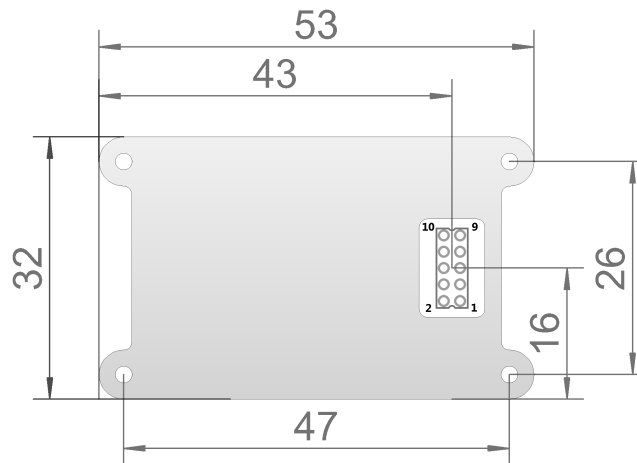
The piMAGGYRO Dimensions, Connector pinout and recommended footprint. NOTE: The piMAGGYRO is displayed from the TOP side. Pins from the through hole connector are aiming down through and below the system PCB. The SMD mount connector type HARWIN M22-6360542 is recommended. Dimensions are shown in millimeters. The unit is mount using four M2x8 screws (including 1.6 mm system PCB). Detailed STEP model available.
